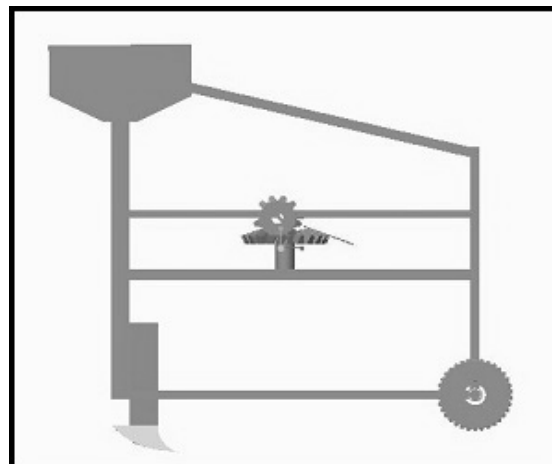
Side View- Design of Seed sowing cum Fertilizer machine
